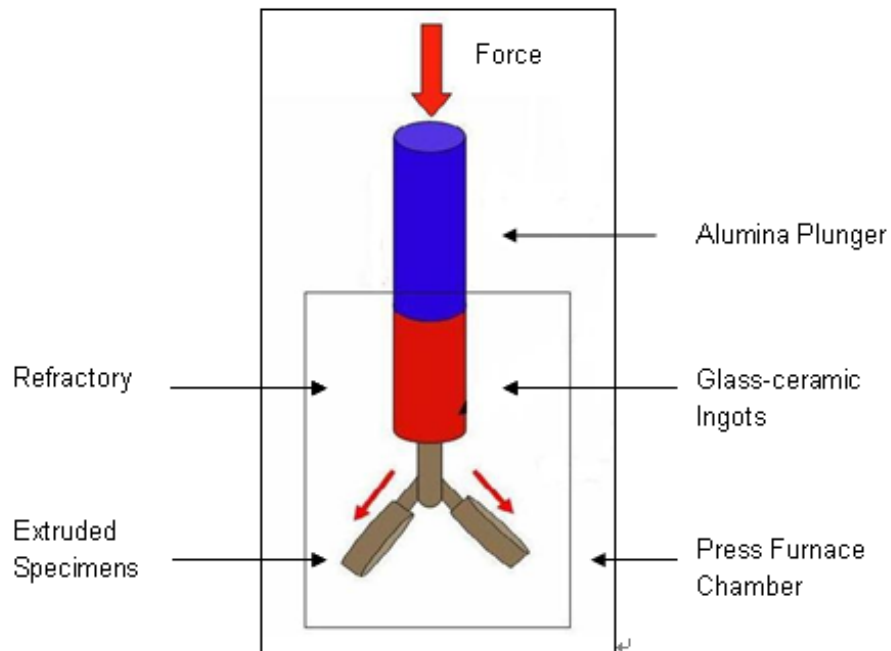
Schematic of the heat extrusion within press furnace chamber.
